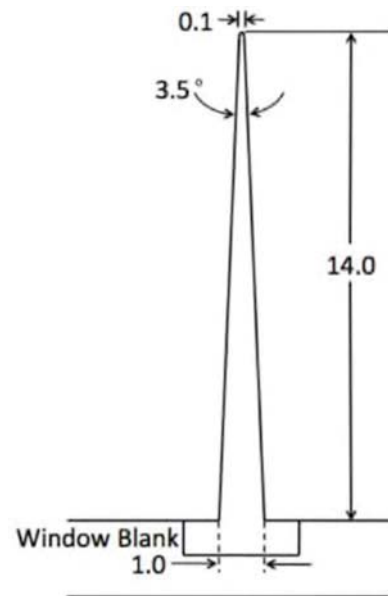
Cross section of RF1 rail (dimensions in inches)
